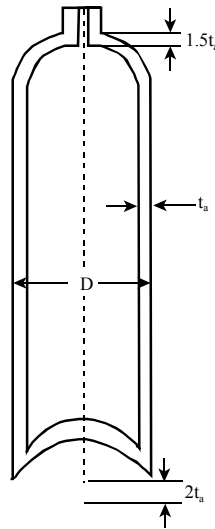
Cross-Section Typical Flat-bottom CNG Cylinder Design
